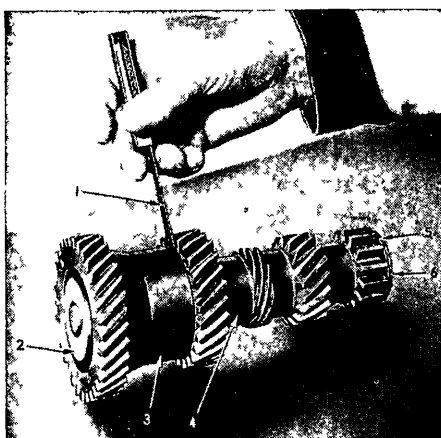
Checking free wheeling gear end play. 1941-42 vacuum-operated transmission. 1. Feeler gauge. 2. Thrust washer. 3. Free wheeling gear. 4. Countershaft gear. 5. Steel washer. 6. Bronze washer
